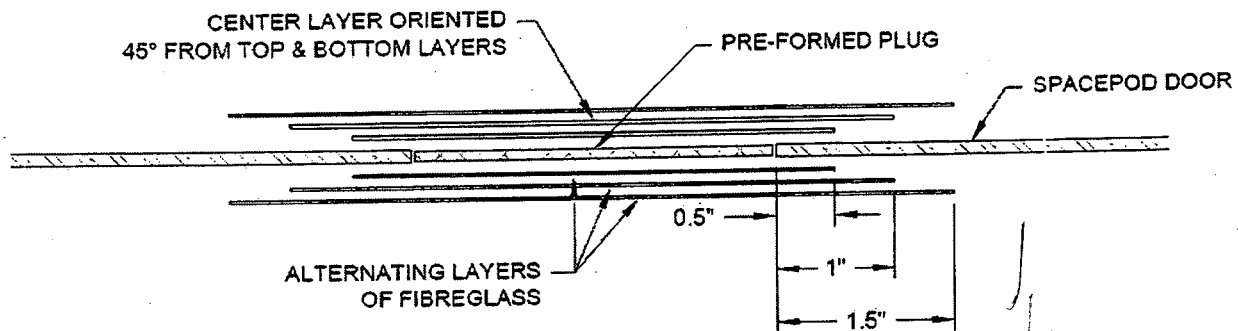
LATCH HOLE REPAIR IN SPACEPOD™ DOOR
